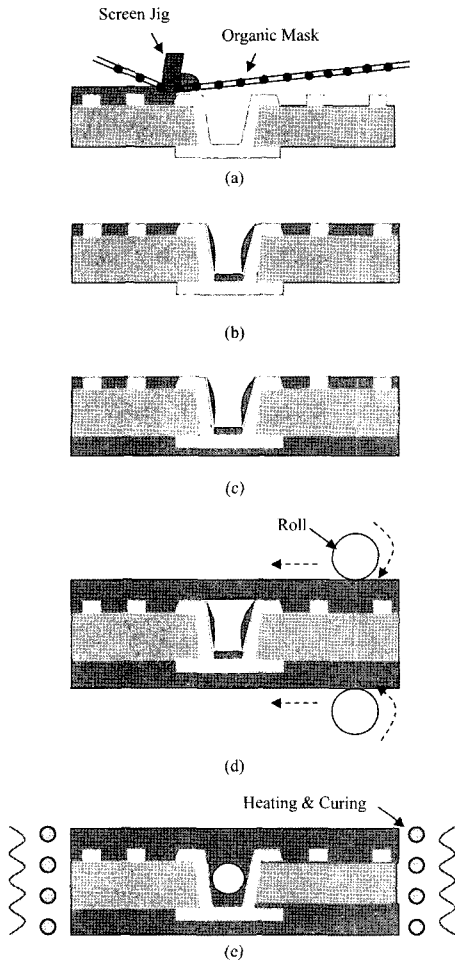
Schematic view showing solder resist process. (a) Squeeze printing using organic mask, (b) solder resist coating at the comp side forming inadequate filling of solder resist, (c) solder resist coating at the solder side, (d) roll coating both side, (e) forming the residual void in blind via hole by inadequate filling of solder resist.
